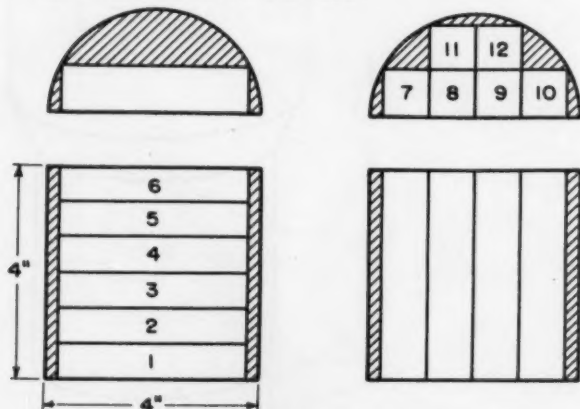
Test bar locations in 9 in. high cylinder casting.
